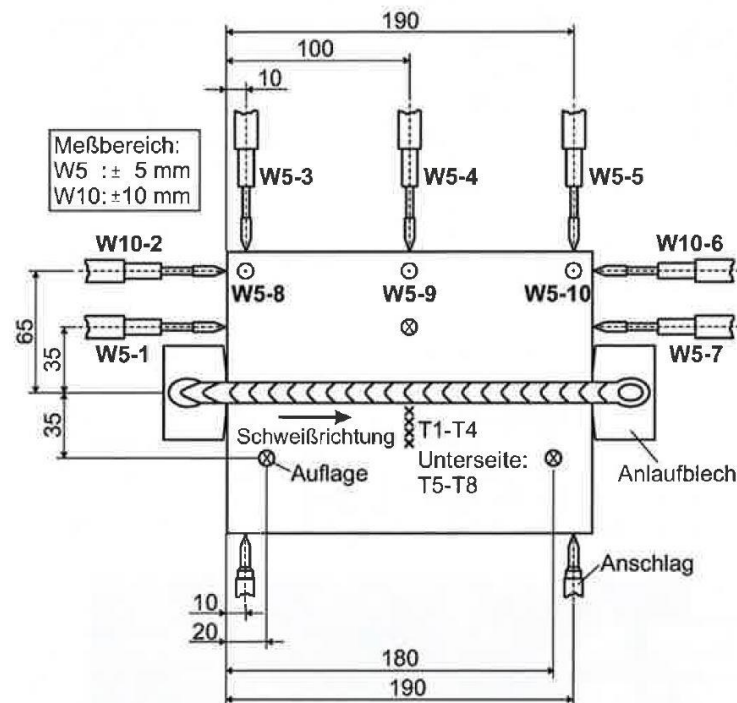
A sketch of the experimental welding arrangements of Voß (2001)
